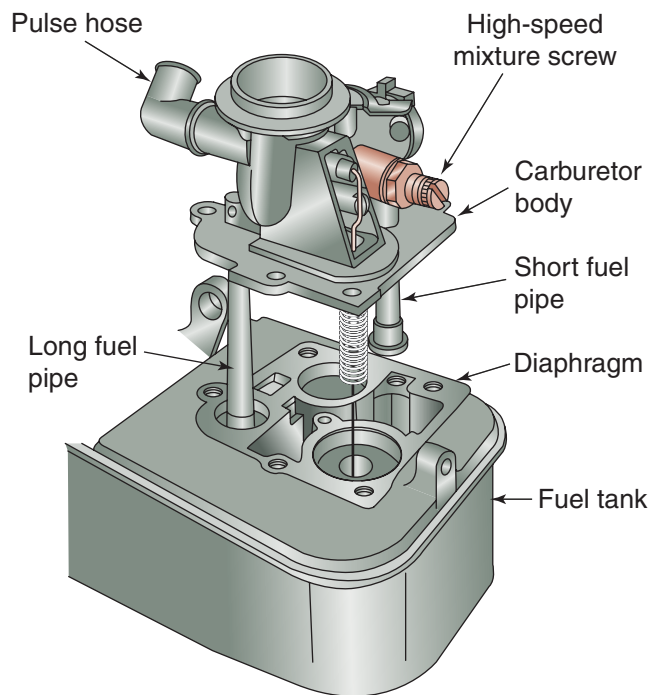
The suction feed diaphragm carburetor is one that combines the features of a vacuum carburetor and the impulse fuel pump.
